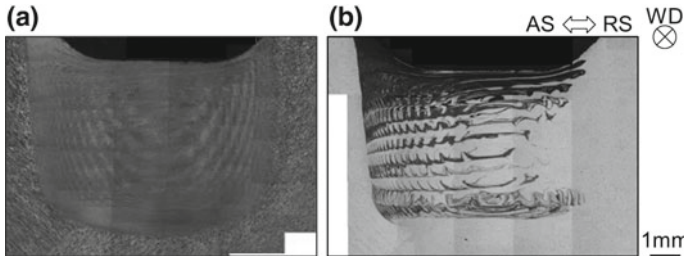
Cross-sectional overviews of the weld with 7075 filler wire etched by a Barker's reagent and b Keller's reagent
